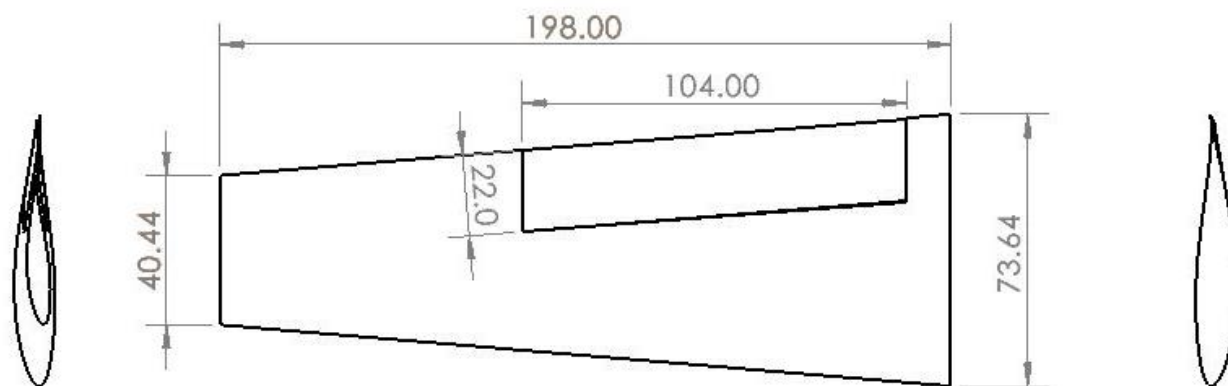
Dimensioned drawing of model of designed wing. Top and side views. Units in inches.
